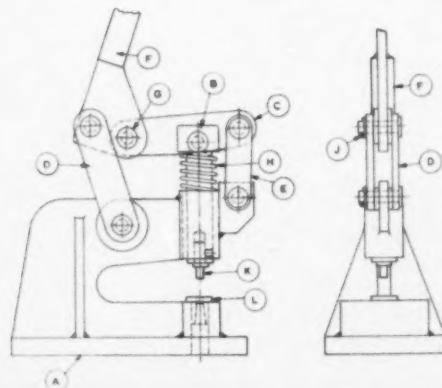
A small toggle press built-up from strip material with a fabricated base is useful for light assembly work, piercing odd holes in sheet metal or cardboard and eyelet clinching.
